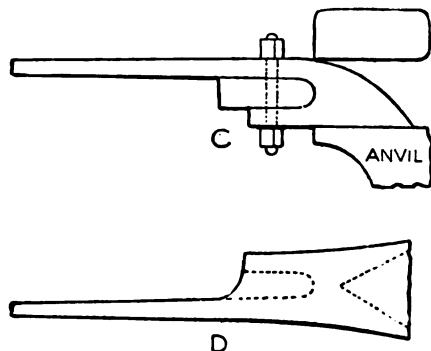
METHOD OF FORGING A NEW SHOVEL TOOTH.
